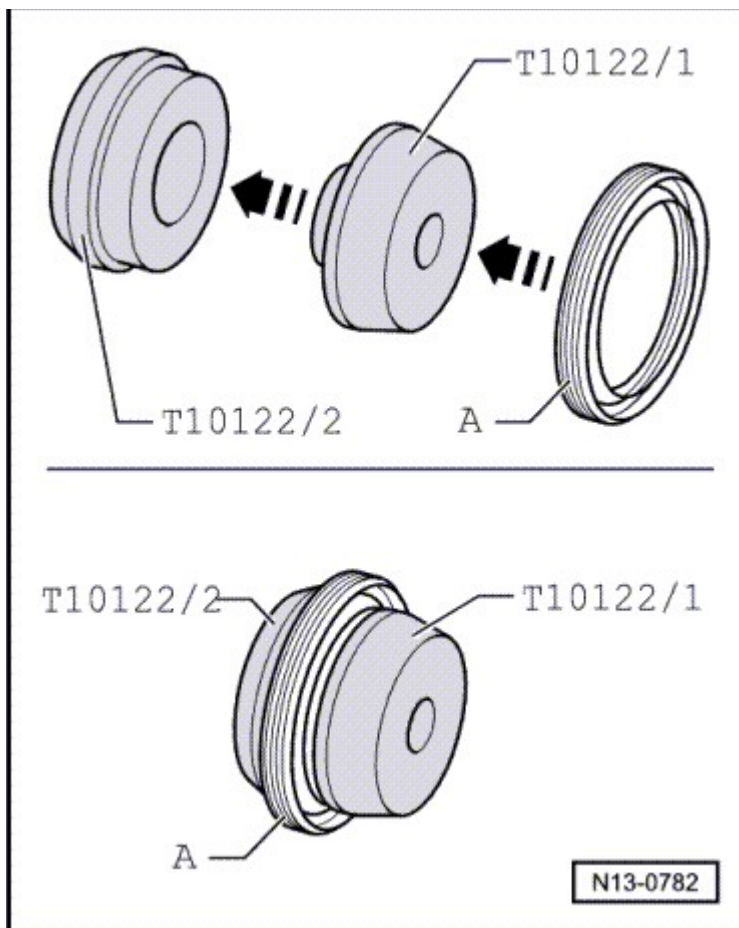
Identifying Seal, Sleeve T10122/1 And Assembly Tool T10122/2
